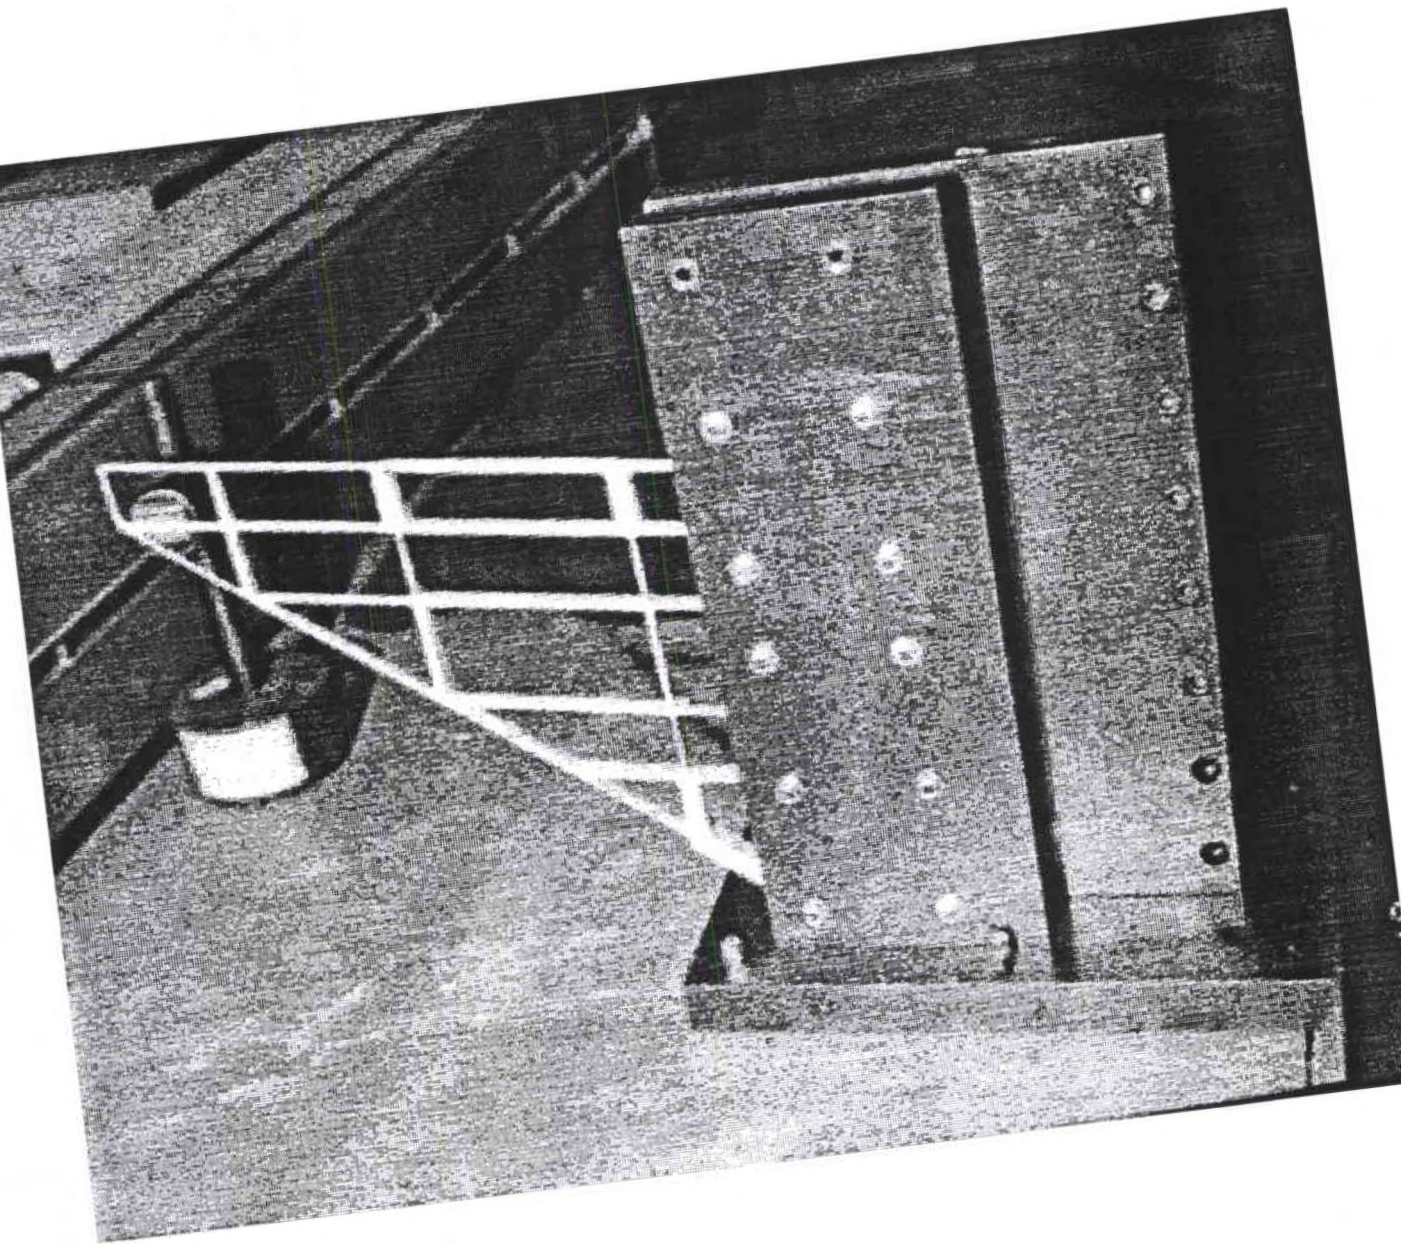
Test Structure and Mounting Fixture On Testing Table
